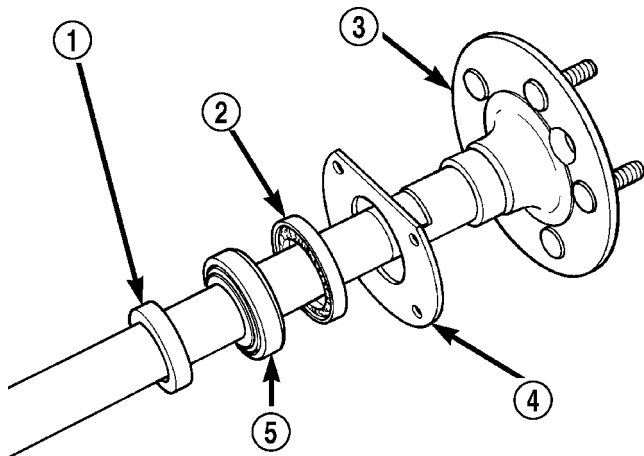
AXLE BEARING AND SEAL COMPONENTS
